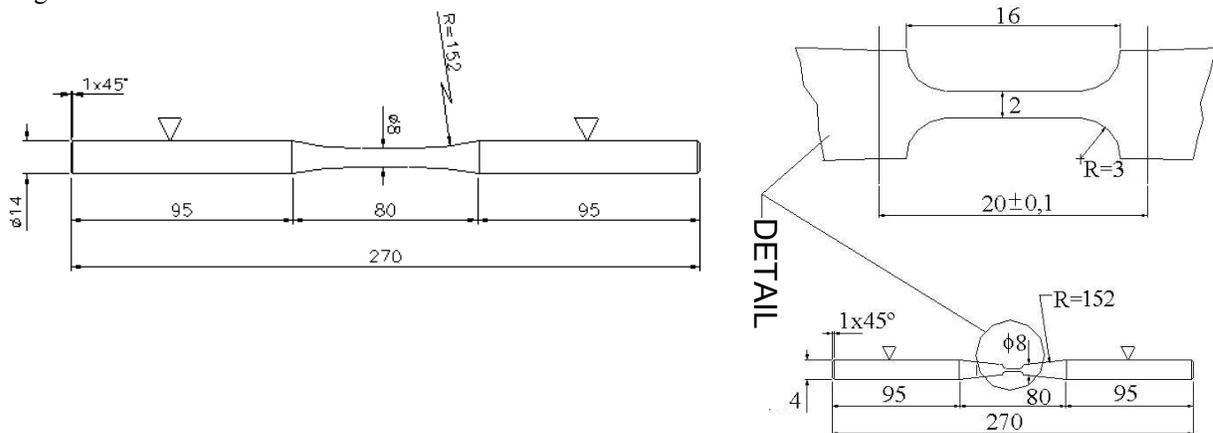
Fatigue Specimen (Dimensions in mm) – Rotating-bending for step-stress fatigue test (left); Axial for Barkhausen measurements (right)
